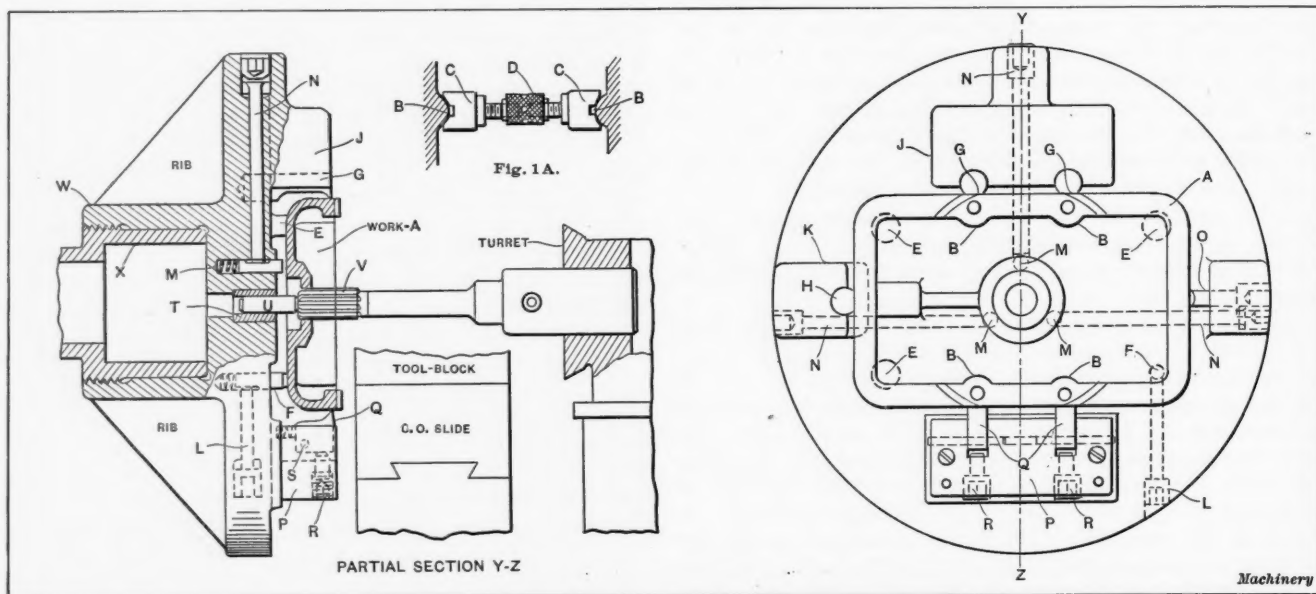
Chuck for Rectangular Aluminum Castings used on Horizontal Turret Lathe
